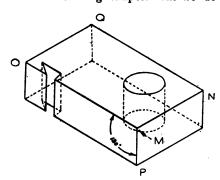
ISOMETRIC DRAWING OF BLOCK, SHOWING CYLINDRICAL HOLE AND MORTISE.
